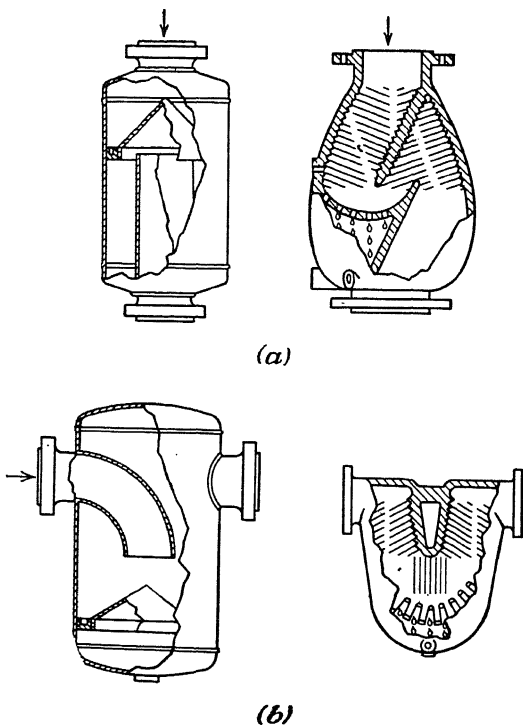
Steam receivers and moisture separators: (a) vertical types; (b) horizontal types.
